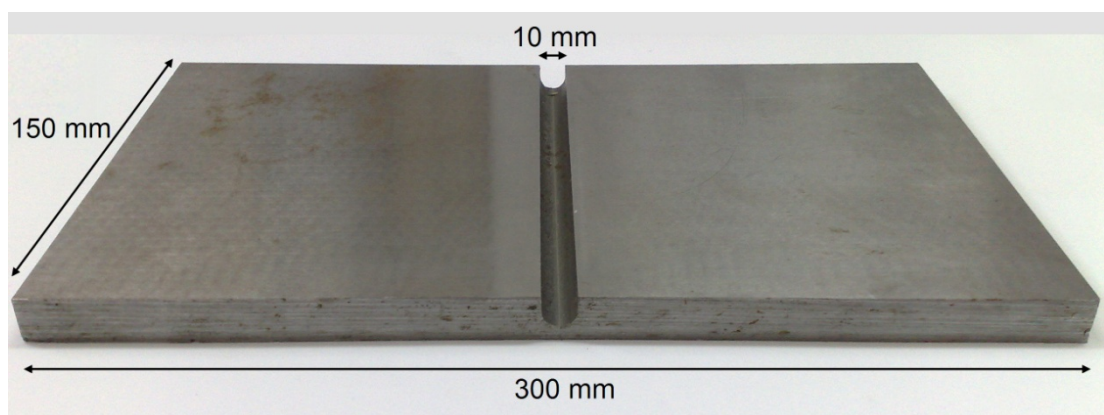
U-grooved P355NL2 plates (15 mm)
